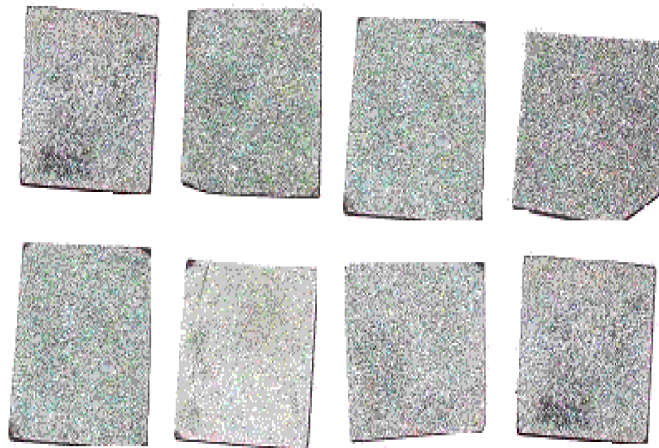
AISI D2 workpiece for WLT, SCD, SR and RS
